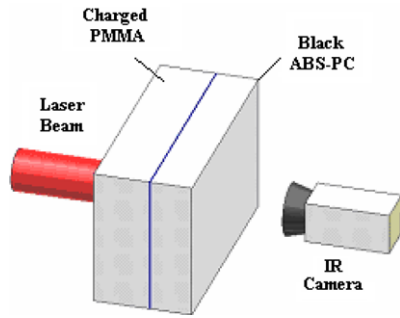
Schematic set-up for through-transmission laser welding.
